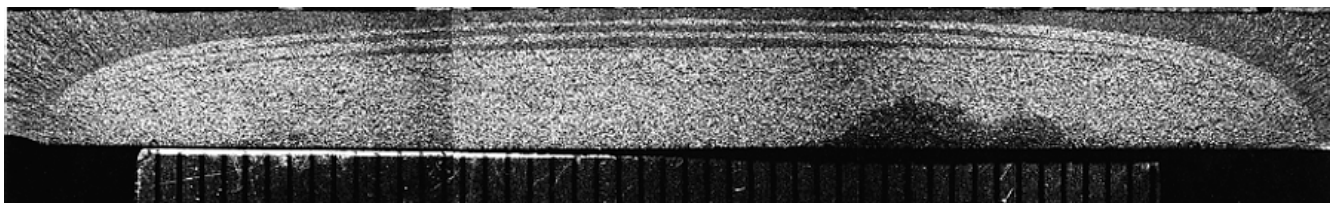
Fracture surface of D6-aC steel specimen with crack growth from multiple loading and fatiguing cycles.
